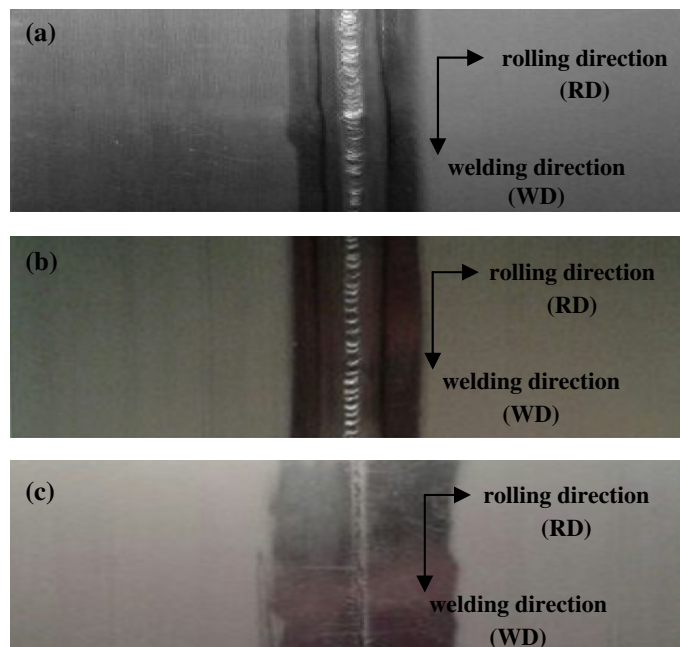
Welded, cold rolled NOES samples using (a) TIG, (b) Plasma and (c) EBW as the welding techniques.
